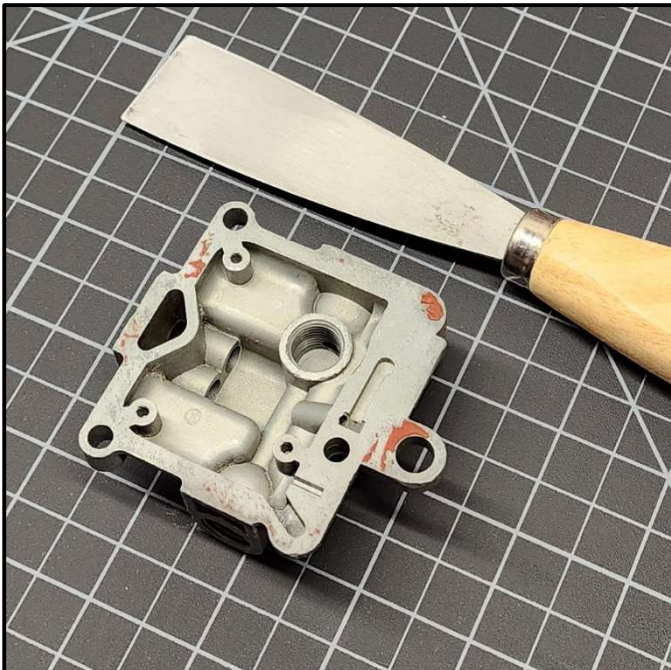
Residual RTV fluid used in the previous installation is visible, and needs to be removed to ensure a proper seal.
